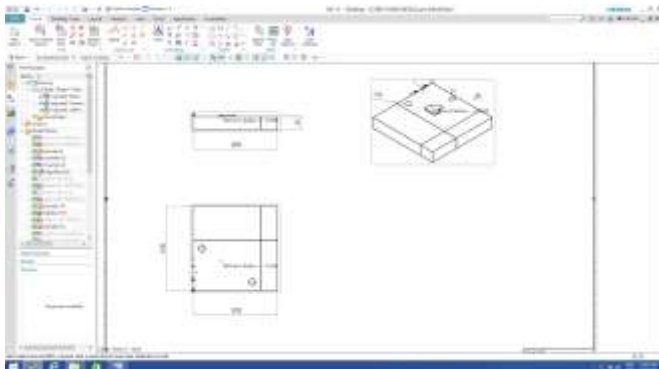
Dimensional Design of Core Hand Mould Part
